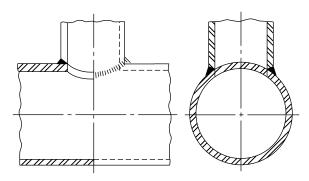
Typical Welded Branch Connection
